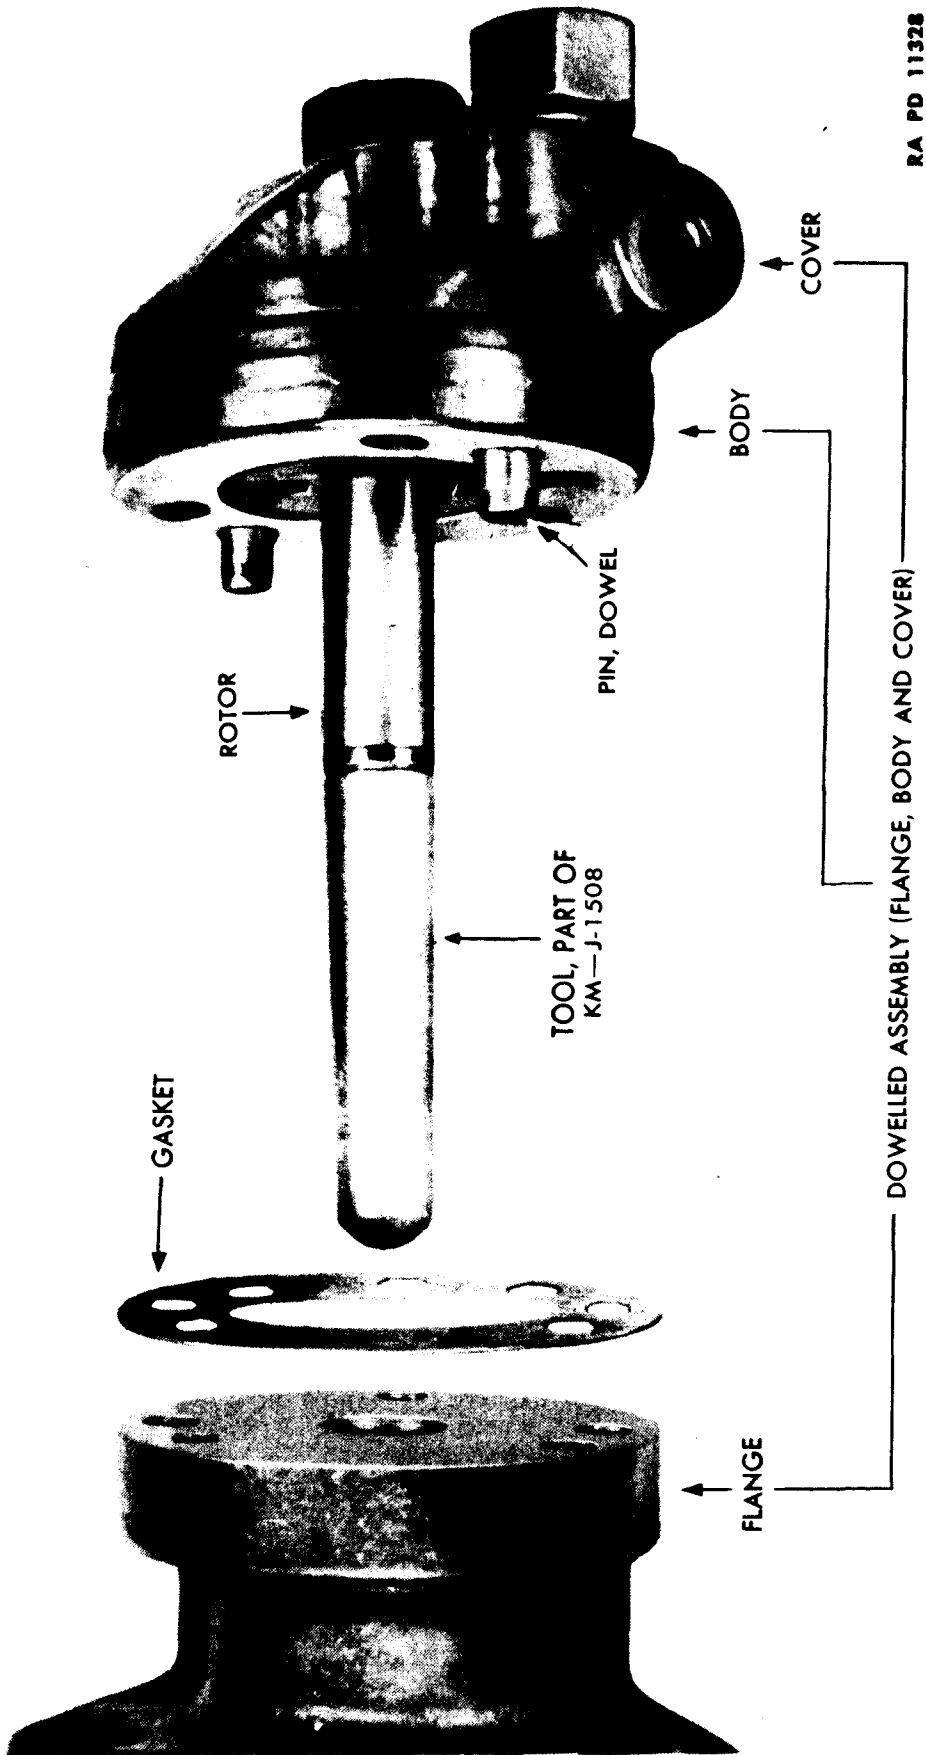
Using Tool KM-J-1508-3 to Assemble Fuel Pump
